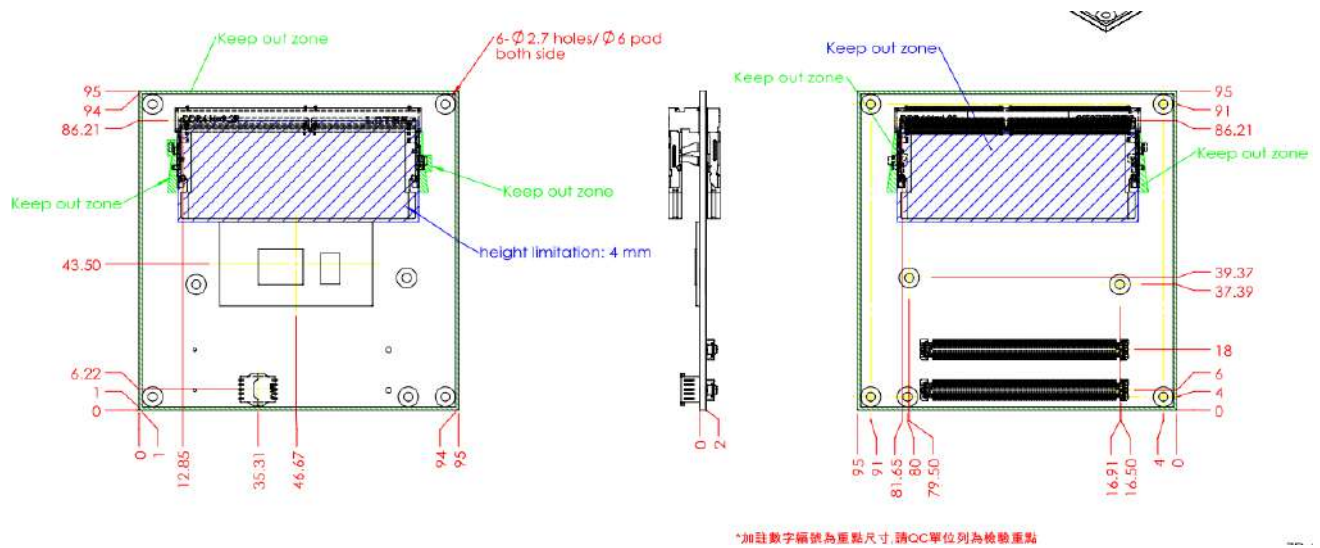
PCOM-B656VGL Dimension – TOP & Bottom
